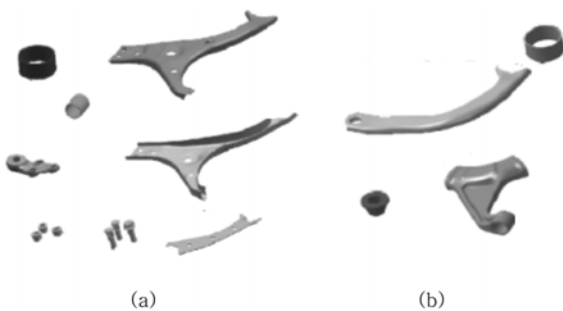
The parts for assembling the Lower Arm: (a) steel press and (b) hybrid-lower arm.
